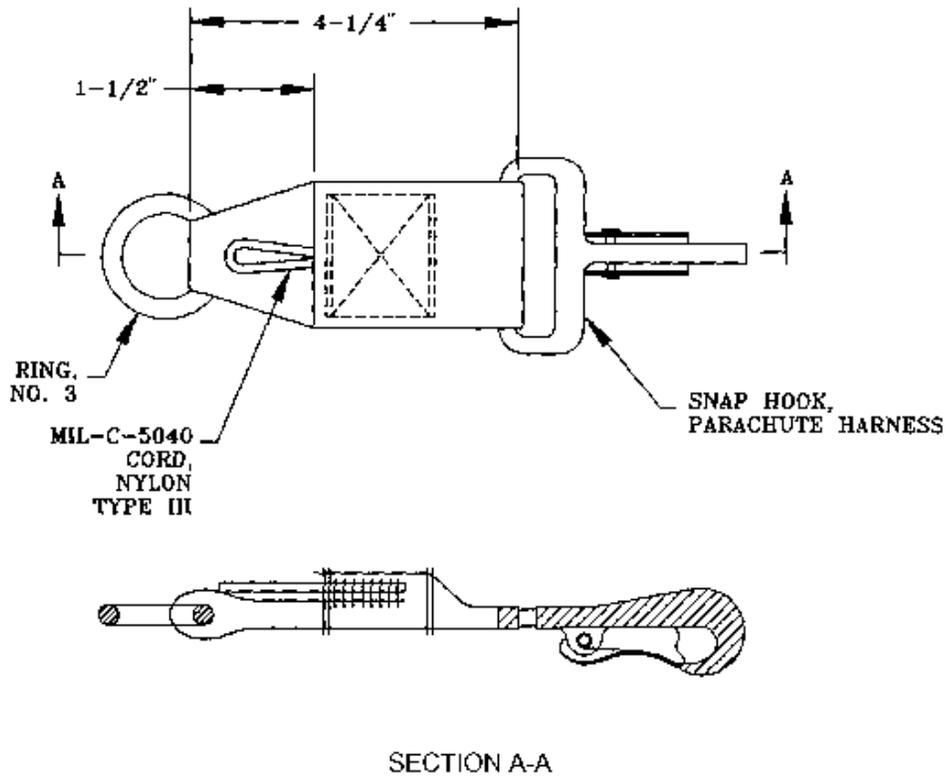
(CONTAINER FRONT MOUNTED) ATTACHING STRAP
